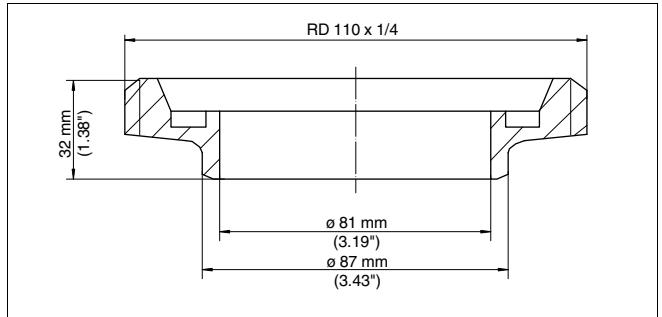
Dimensions welded socket, bolting DN 80 according to DIN 11851
